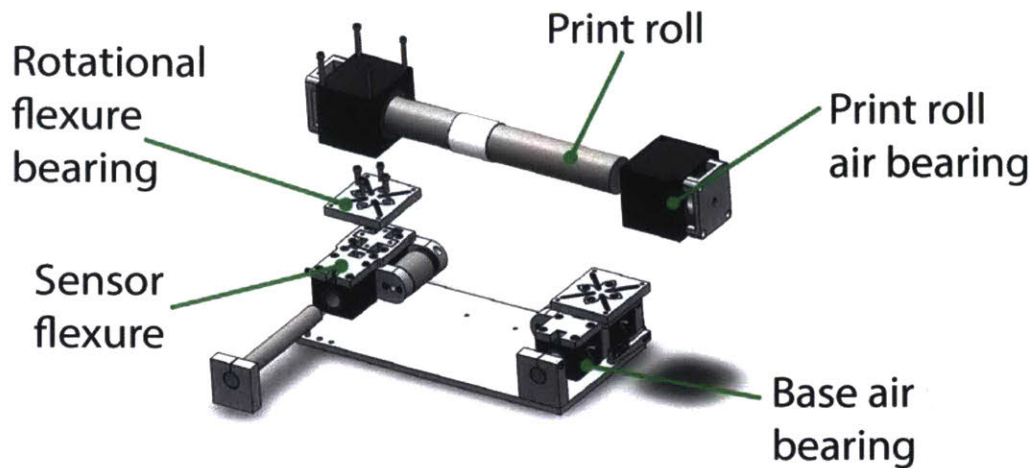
Exploded view of the printhead assembly.* Major components of the printhead assembly are labeled.
